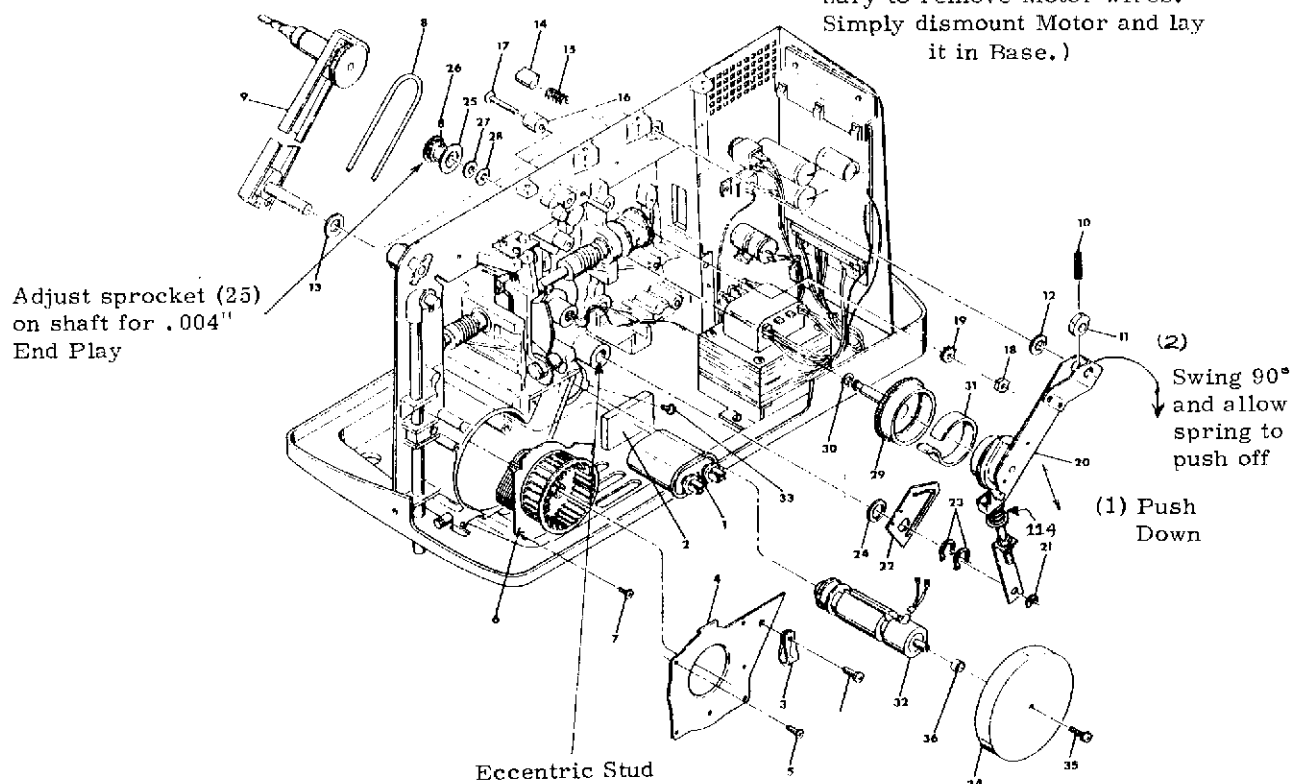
DISASSEMBLY AND REASSEMBLY
